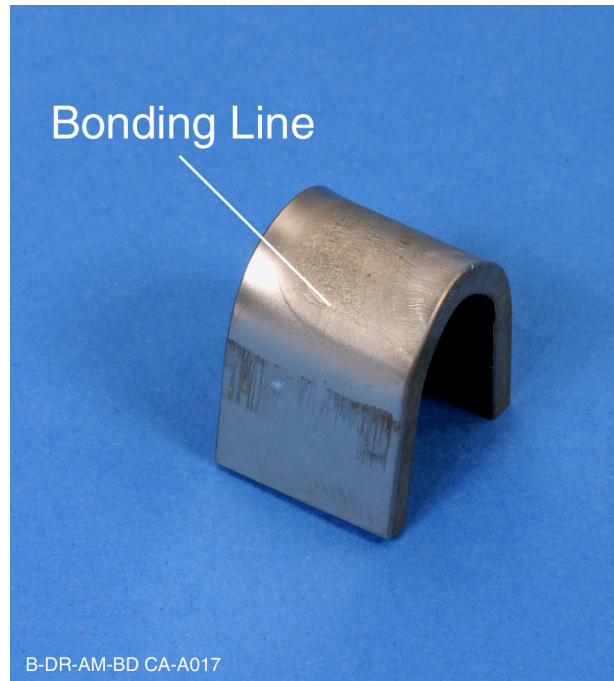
Bend test specimen CA-A017 (Cylindrical hole geometry).
